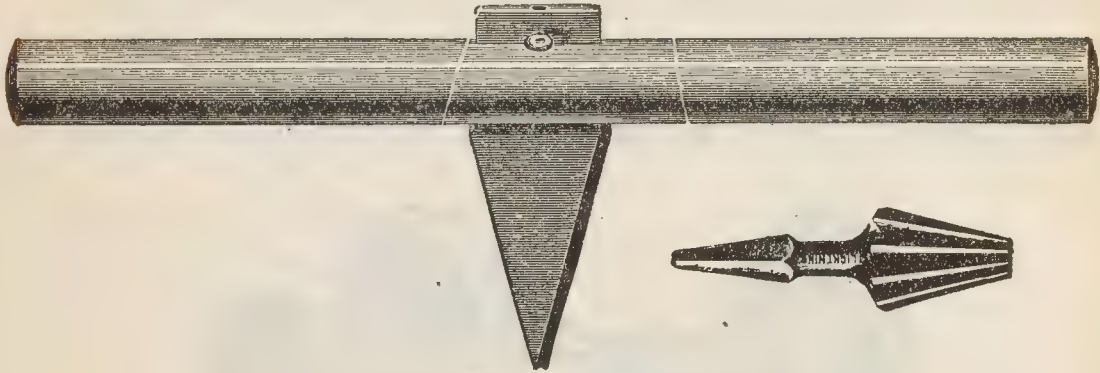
,262 to 6,265.—Bernz bibb seat dresser and cutters, regular style with cone threaded on the inside only.
